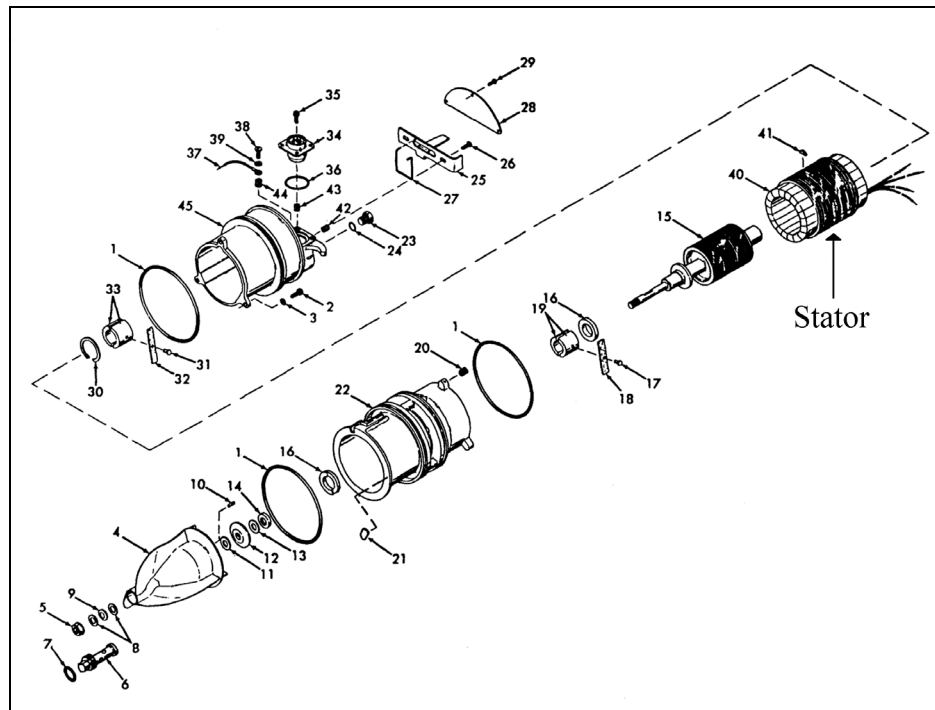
An Illustrative Stator position in the Fuel Booster Pump, Exploded View
